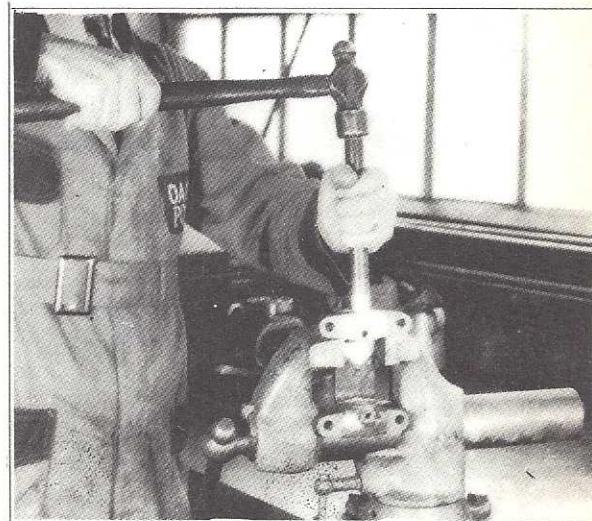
HM-429 or HM-451 King Pin Bushing Driver in Operation
